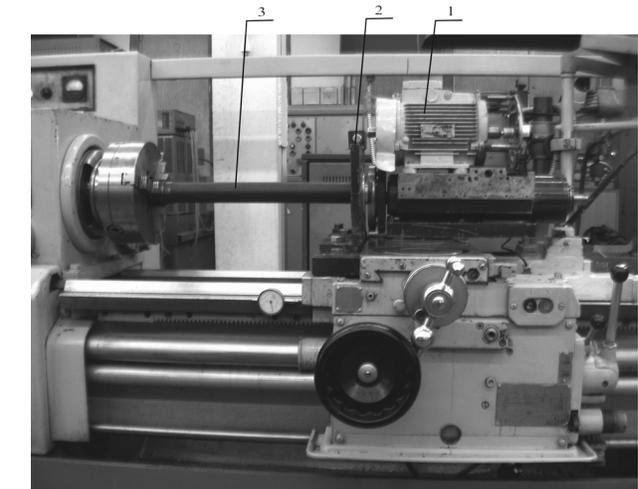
Lathe modernized for slotting by DC technology: 1—tool spindle, 2—follow rest, and 3—workpiece
